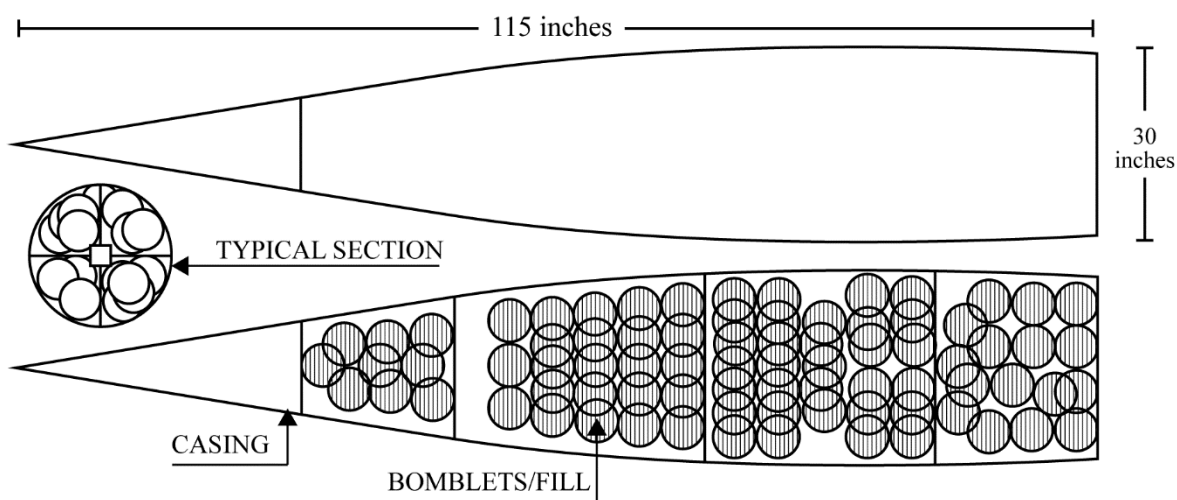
Warhead, 762-mm, Rocket, M190 (E19R2), Honest John - Line Drawing
